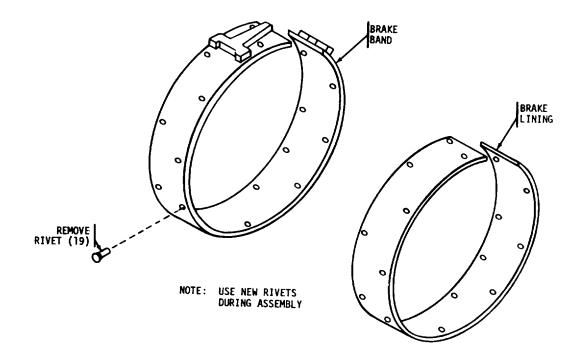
Main and hoist winch bide band assembly-disassembly and assembly.
